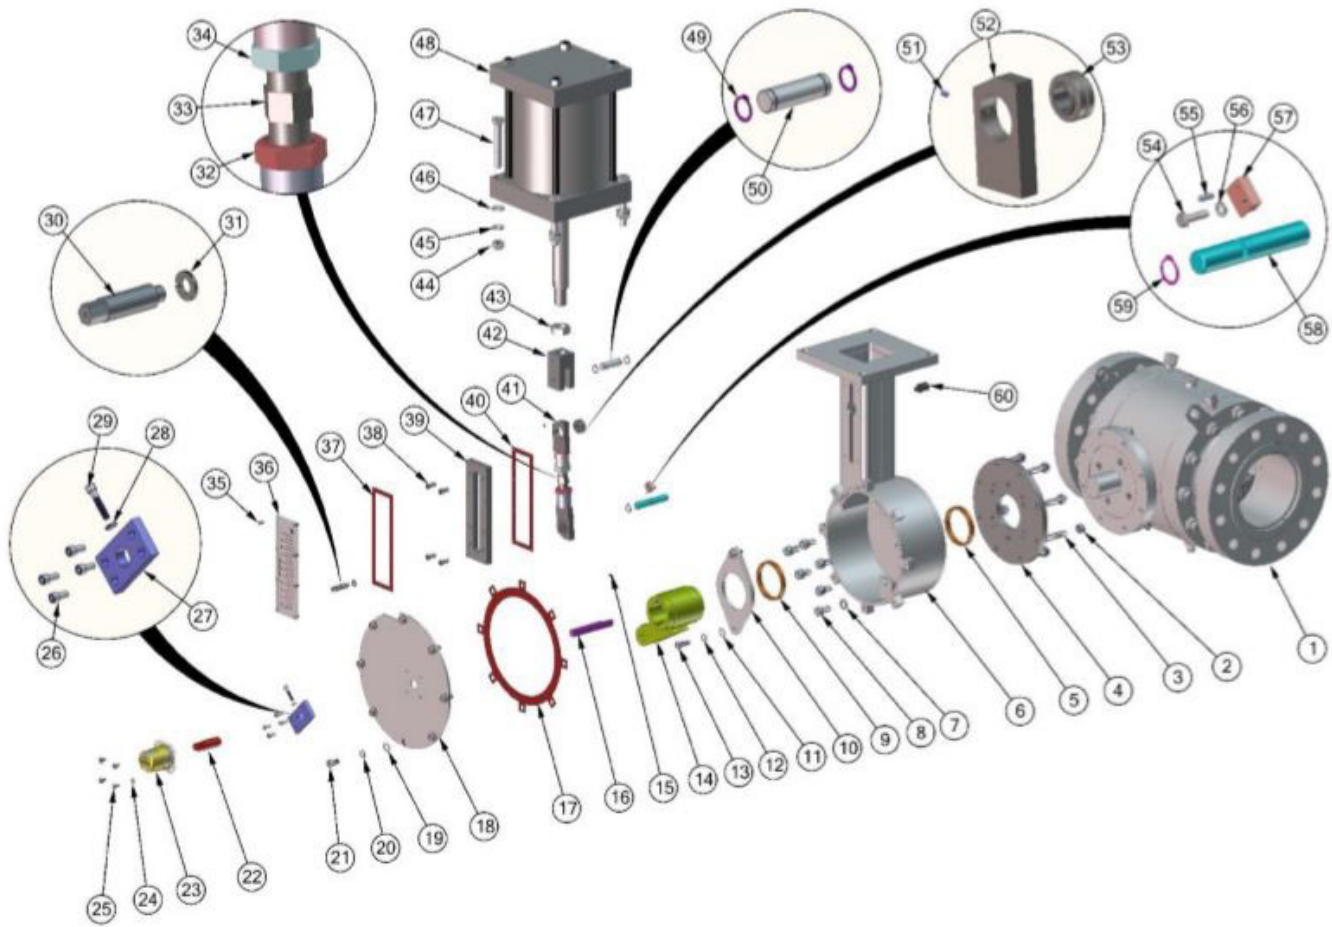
RHPA-DA BELOW GROUND ACTUATOR WITH TAILROD– EXPLODED VIEW
